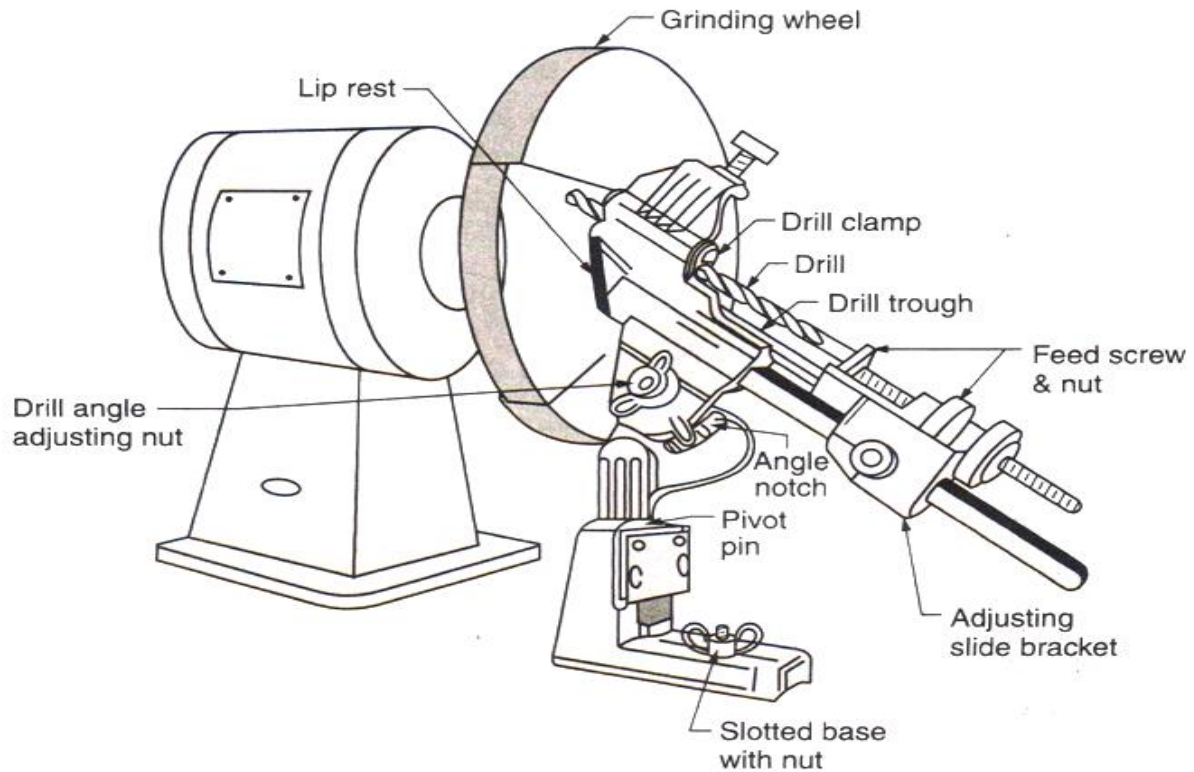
Use of a drill grinding attachment for grinding a twist drill.
